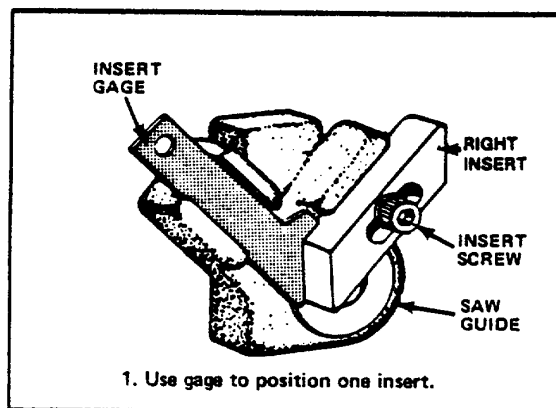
POSITIONING RIGHT INSERT. UPPER GUIDE BLOCK SHOWN.
